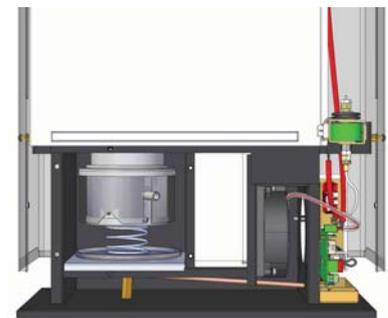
How to detach the thermo element, glow plug and fuel needle.
